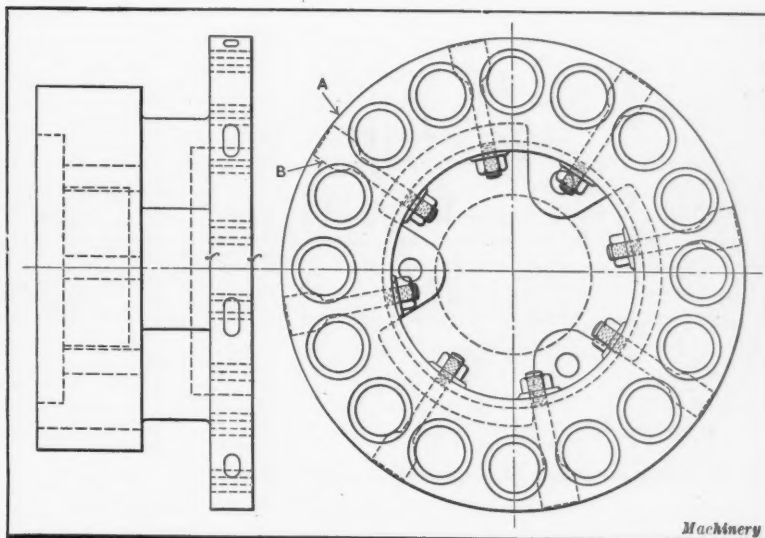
Detail View of the Rotary Fixture used to carry Sixteen Bushings when machining them to Length
